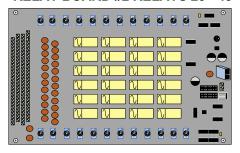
Tunnel Master® wbc Board Orientation and Layout (Image)
